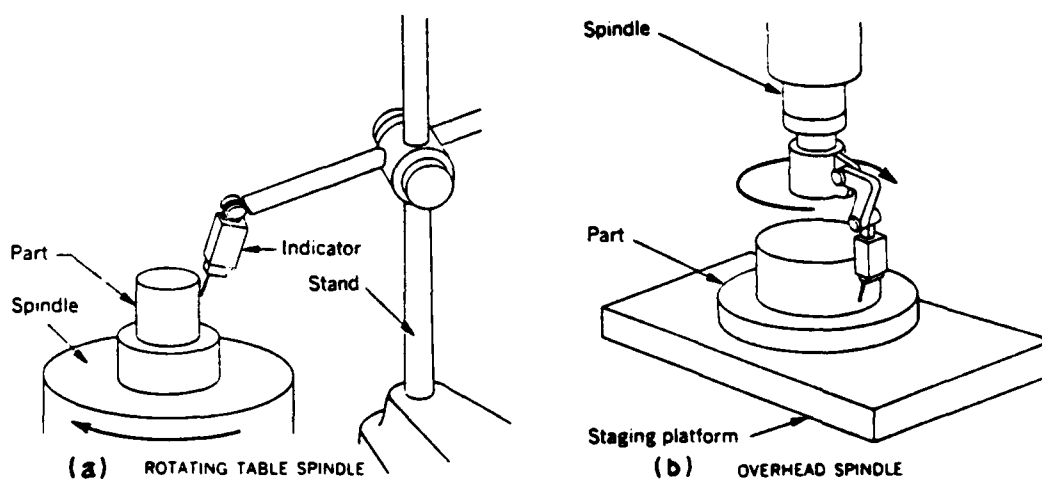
Absolute Methods of Measurement for Workpiece [70]
